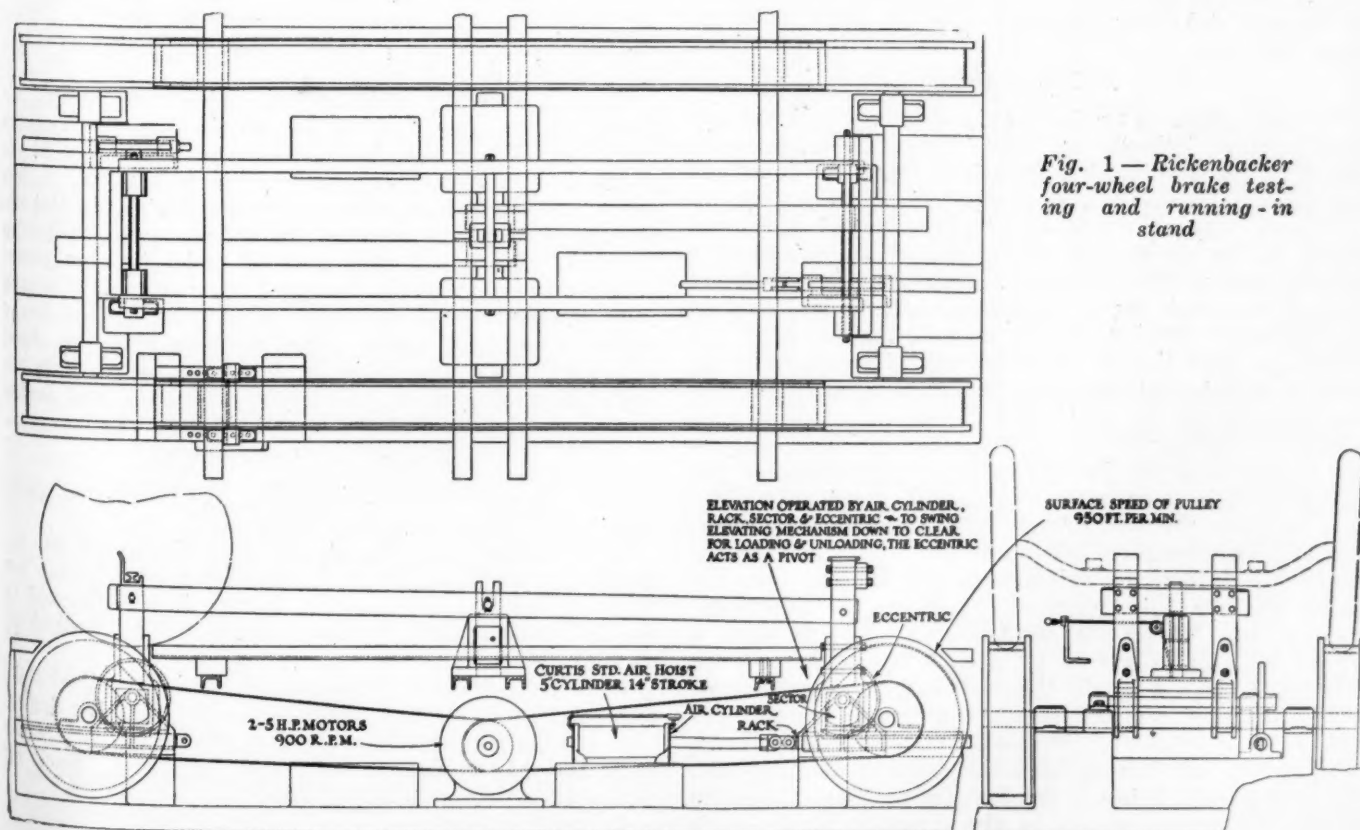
Rickenbacker four-wheel brake testing and running-in stand
